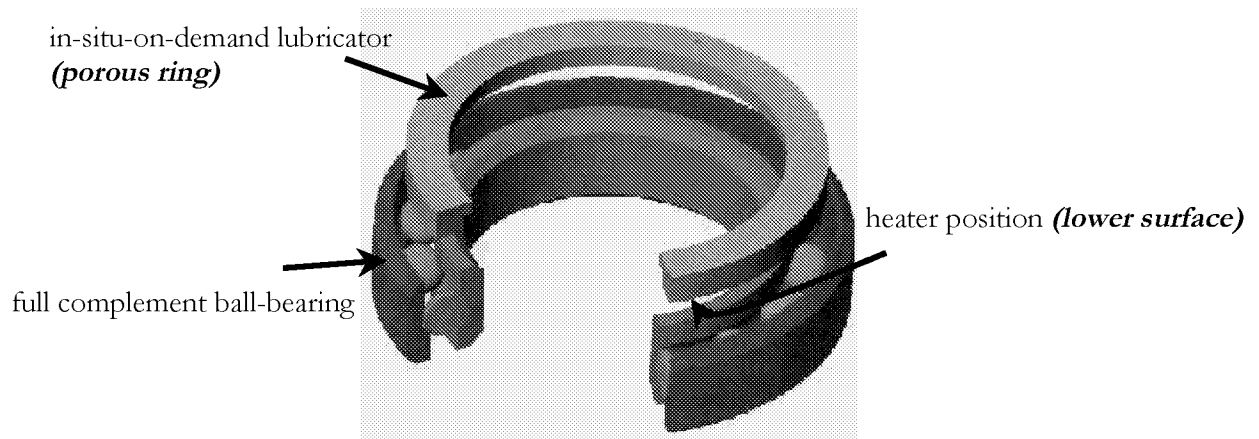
Lubricator attached to the inner ring of a full-complement ball bearing
